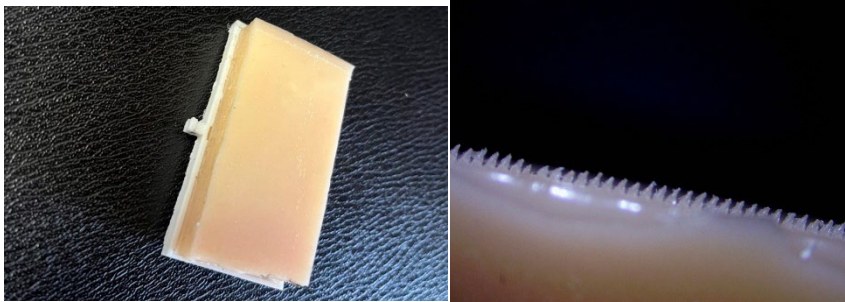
(a) Adhesive pad (b) Wedges on the adhesive pad
